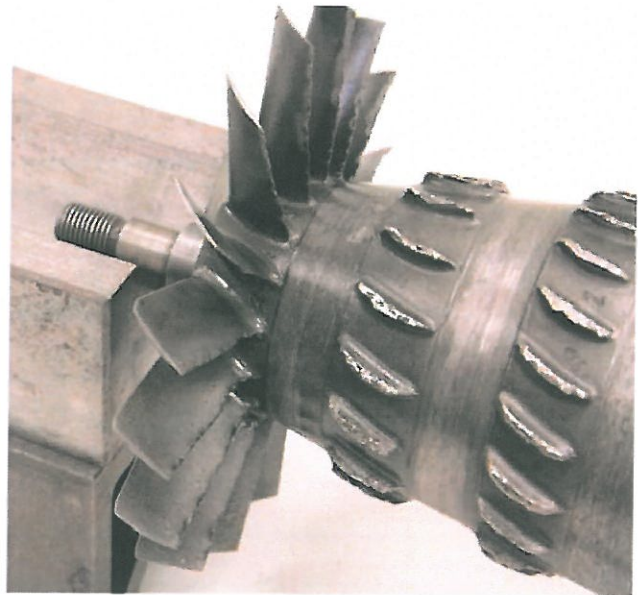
Compressor flange showing fretted surfaces (photo ATSB)
